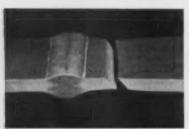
Tensile specimen of MIG weld in 5086 alloy V_4 " plate. Fracture occurred in parent metal at 40,000 psi with 15.7% elongation.
